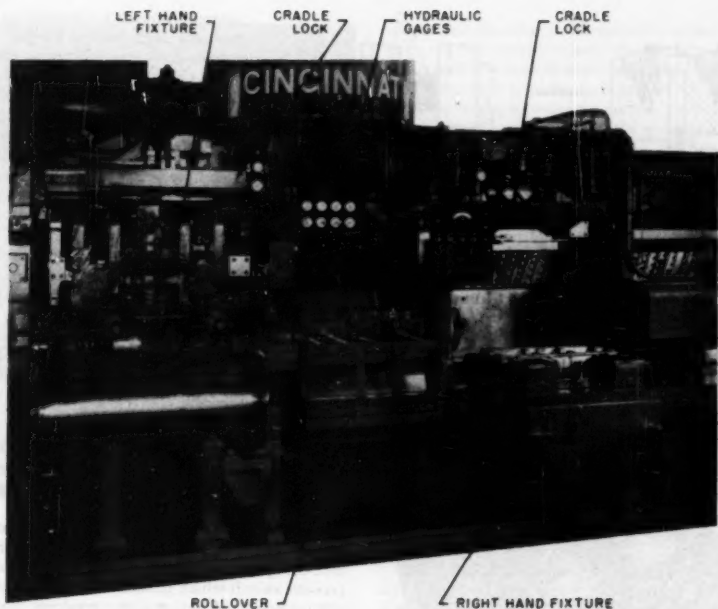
RIGHT-HAND FIXTURE IN LOADING POSITION, LEFT-HAND FIXTURE LOCKED IN CUTTING POSITION
